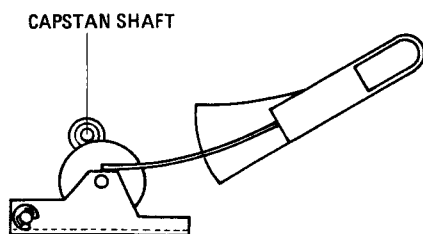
PINCH ROLLER PRESSURE MEASUREMENT
